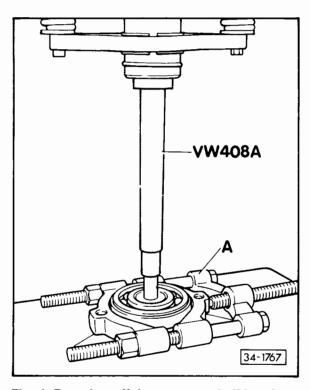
Pressing off deep-groove ball bearing for shaft gear
